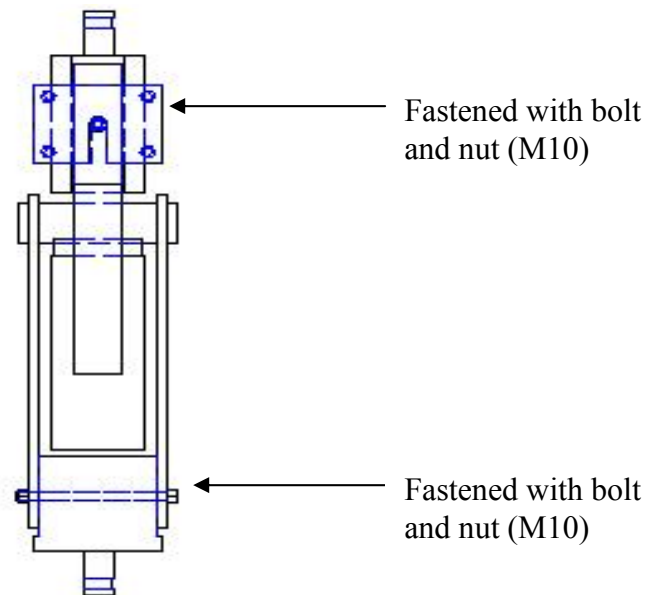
Front view of Tension-Compression test rig and test specimen for second trial
